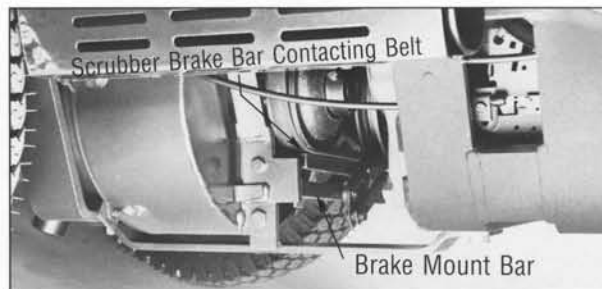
Scrubber Brake Adjustment on Standard GHS Model
